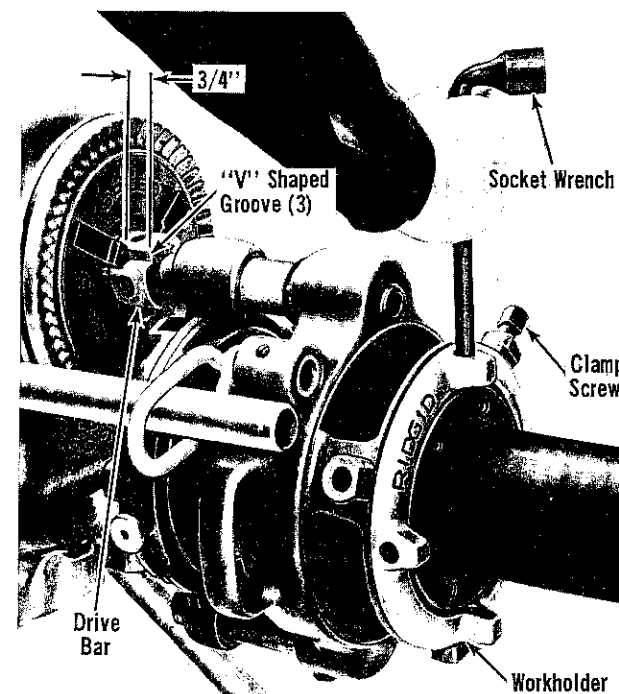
Tightening Workholder on No. 141 Geared Threader (No. 161 Threader Similar).
